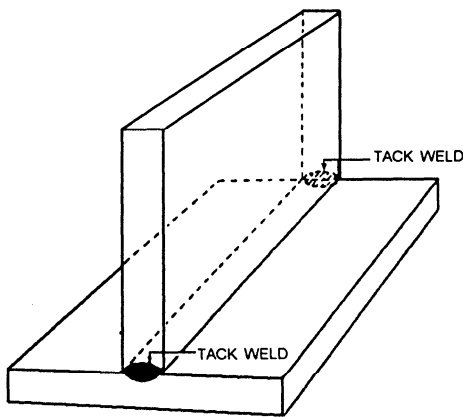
Tack-weld to hold the tee joint elements in place.
